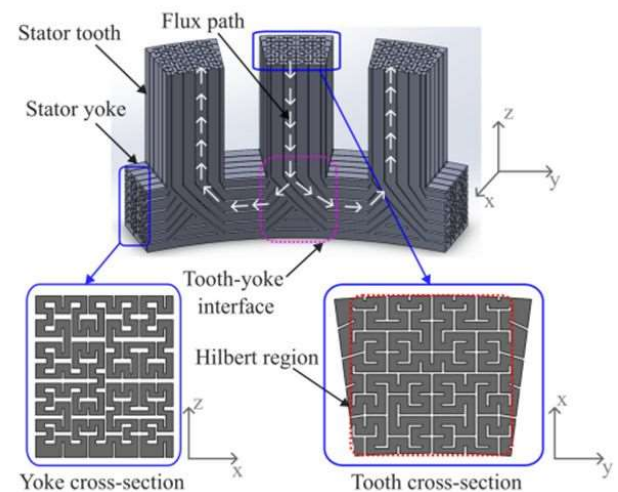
AM axial flux switched reluctance machine using single material 3D printing [25].
